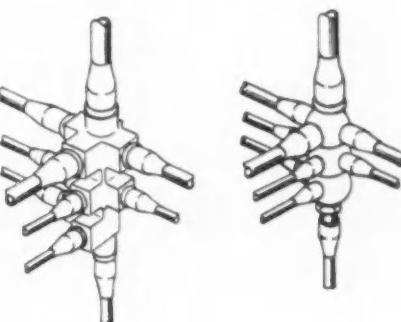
Universal cluster fittings to couple tubes are said to have advantages over the inflexible machined manifold block arrangement at left. The manifold block installation has 10 leakage points and consists of 21 parts; the cluster fitting counterpart has only six leakage points and but 11 parts.
